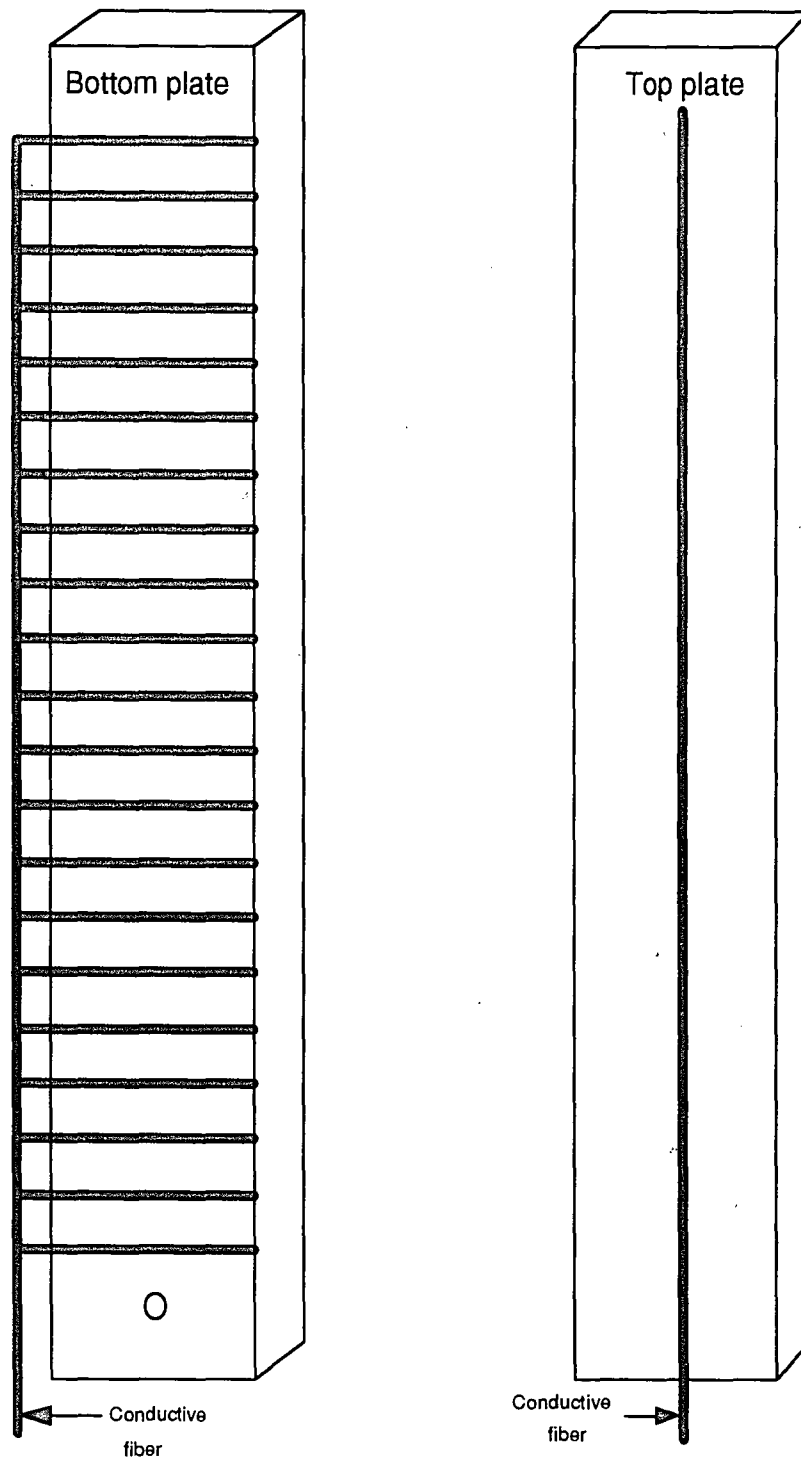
Top and bottom plate of one-dimensional mold with embedded conductive wires
